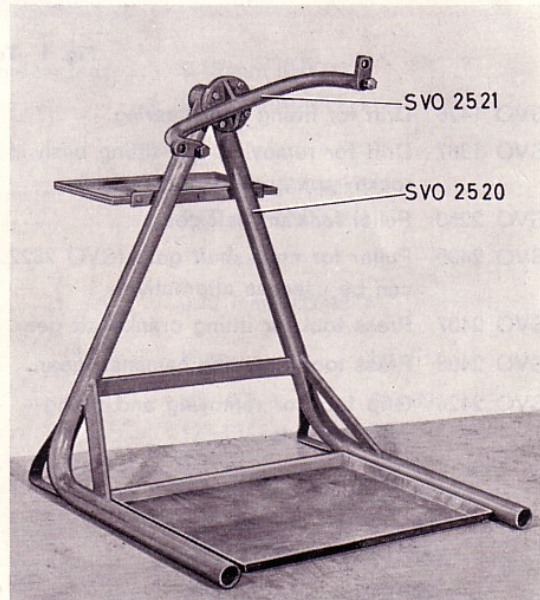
Stand SVO 2520 and fixture SVO 2521 for engine
